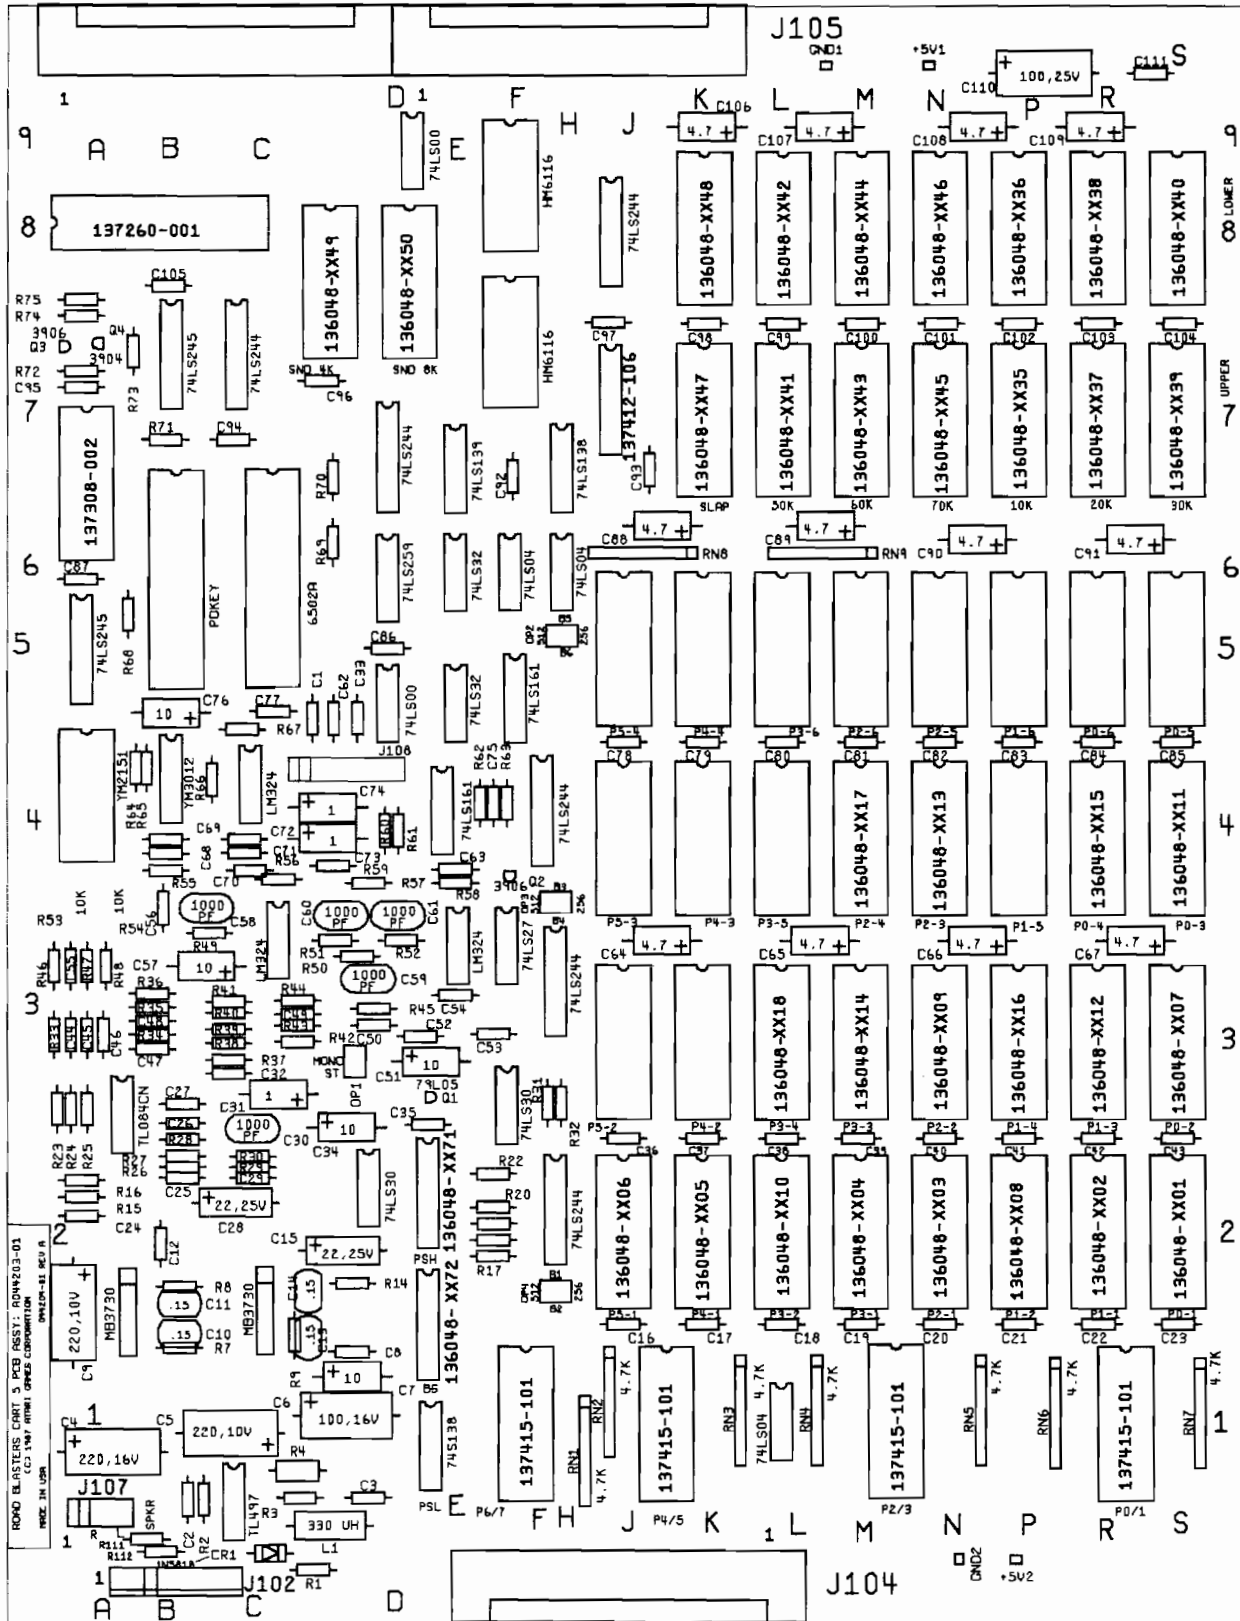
Road Blasters/Cockpit Cartridge 5 PCB Assembly
